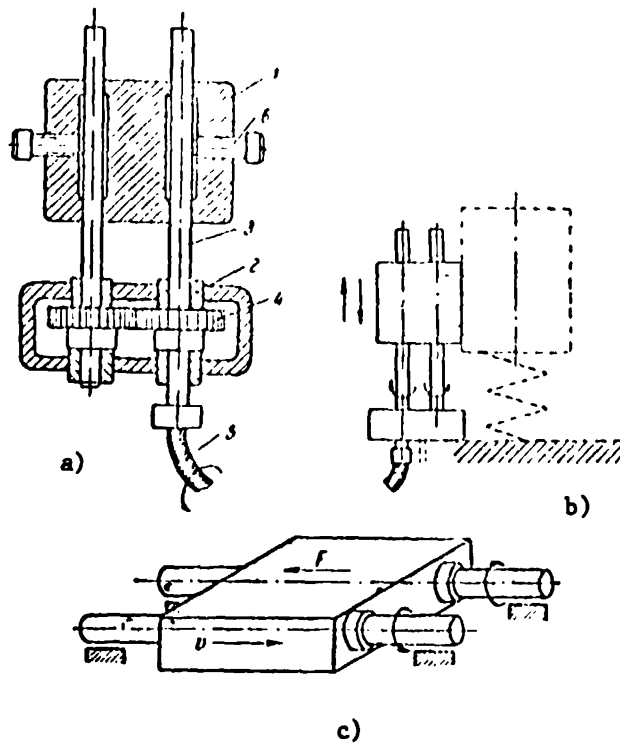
a) Damper scheme; b) scheme for attaching the dampers; c) scheme for cancelling dry friction in the feed mechanism.
